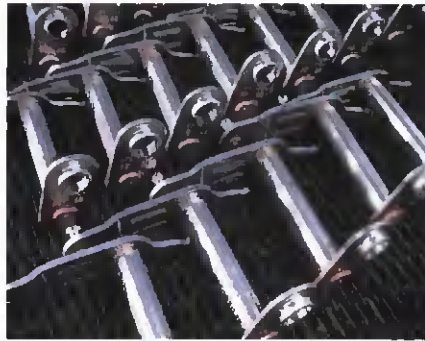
Shown is a copper-brazed mild steel select lever assembly.
